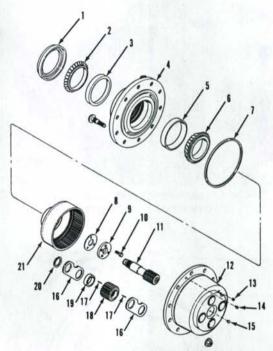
Exploded view of wheel hub and planetary unit used on front drive axle.
